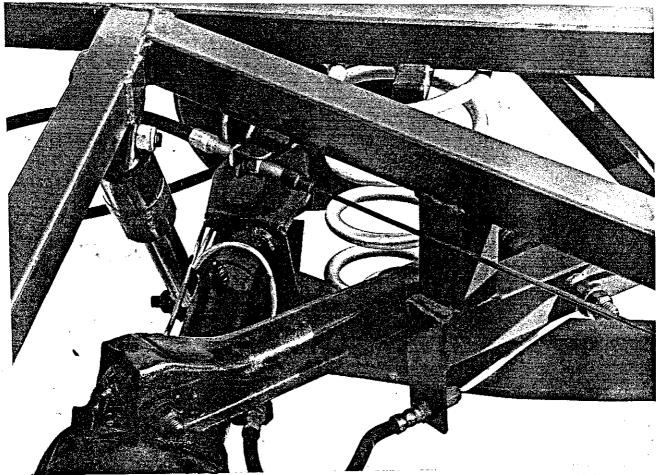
This illustrates the brake cable bracket, the flexible brake pipe mounting, and the inner and outer, upper radius arm mountings .
